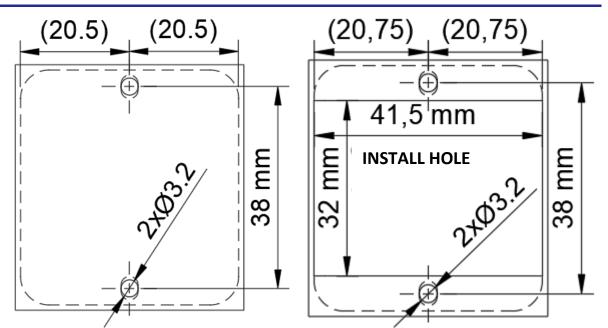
Installation holes a) on the surface b) recessed into the hole
